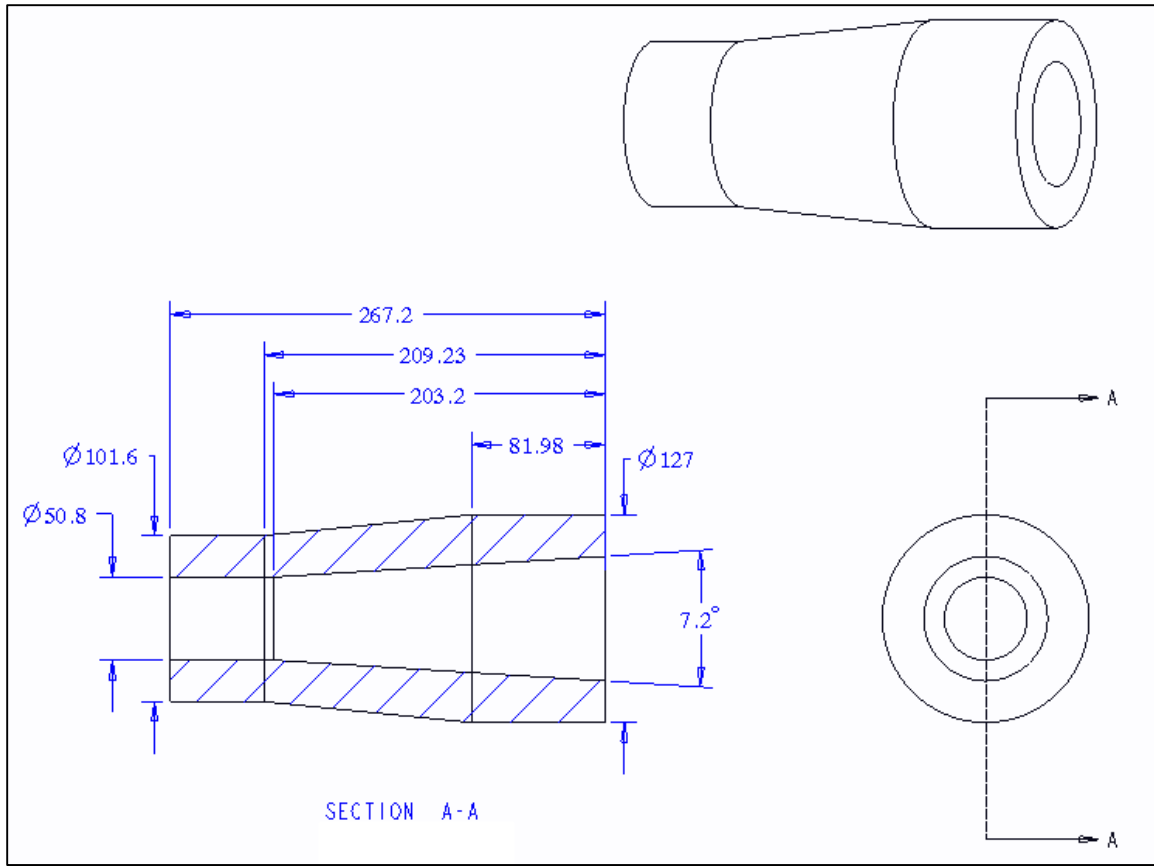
Schematic of nozzle, with all dimensions given in mm.
